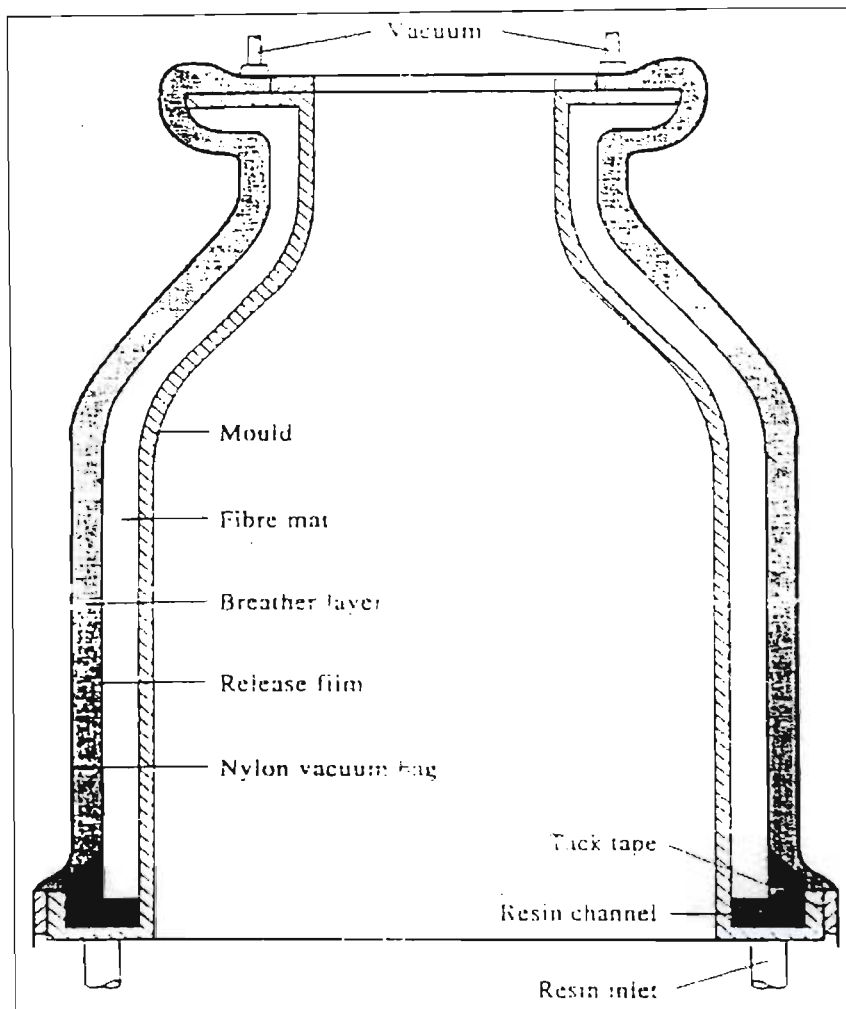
Schematic of resin infusion tooling used to manufacture model smoke tunnels.
